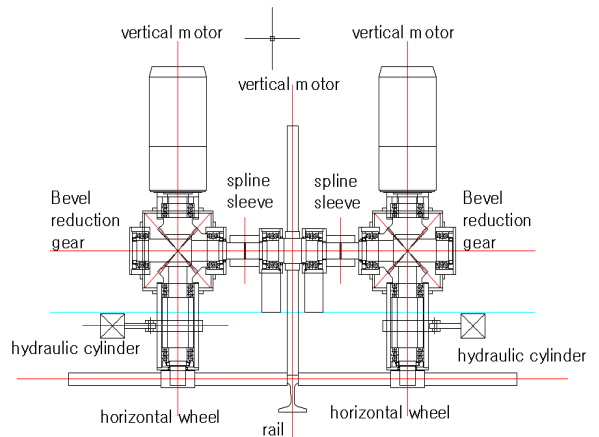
Twin vertical geared motor driven horizontal traction wheel system
